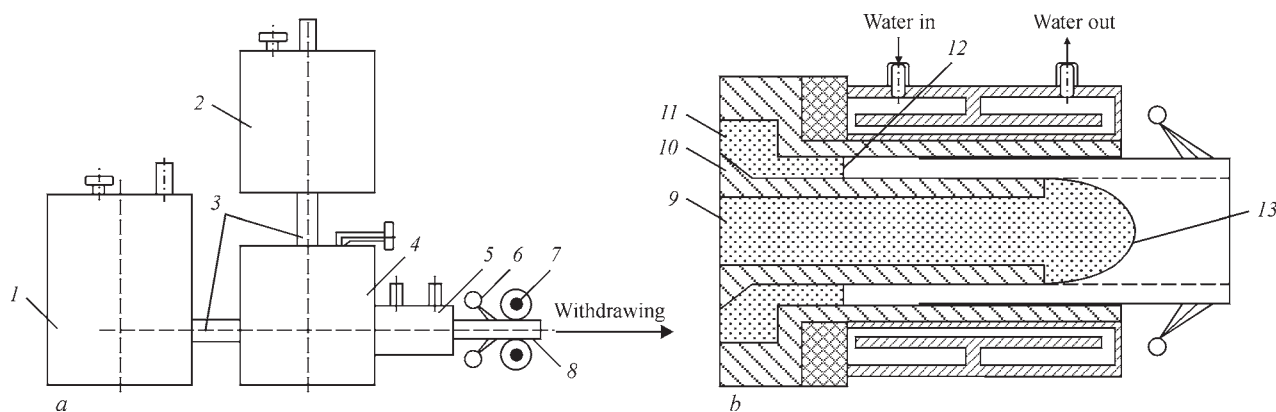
Schematic diagram of the HCFC device for preparing CCA rod: (a) device and (b) composite mold: 1 — molten aluminum holding furnace; 2 — molten copper holding furnace; 3 — runner; 4 — composite mold holding furnace; 5 — composite mold; 6 — secondary cooling; 7 — pinch rolls; 8 — CCA rod; 9 — liquid aluminium; 10 — mandrel; 11 — liquid copper; 12 — solidification front of liquid copper; 13 — solidification front of liquid aluminum
